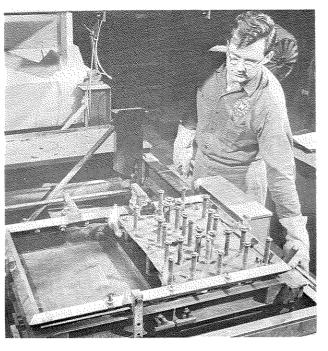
The right half of the machine containing the master pattern is shown flopped over the dump box. The two units are clamped together. (The spring and rod assemblies shown are STRIPPING PINS that will be used later to remove the completed shell.)
